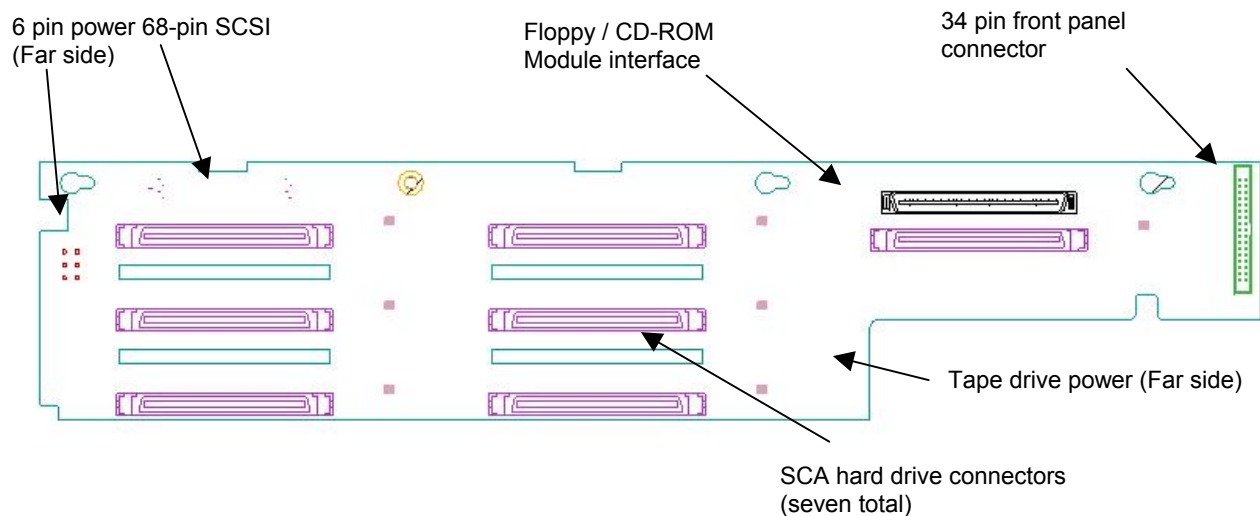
Component Side Hot-Swap SCSI Backplane Connector Placement
